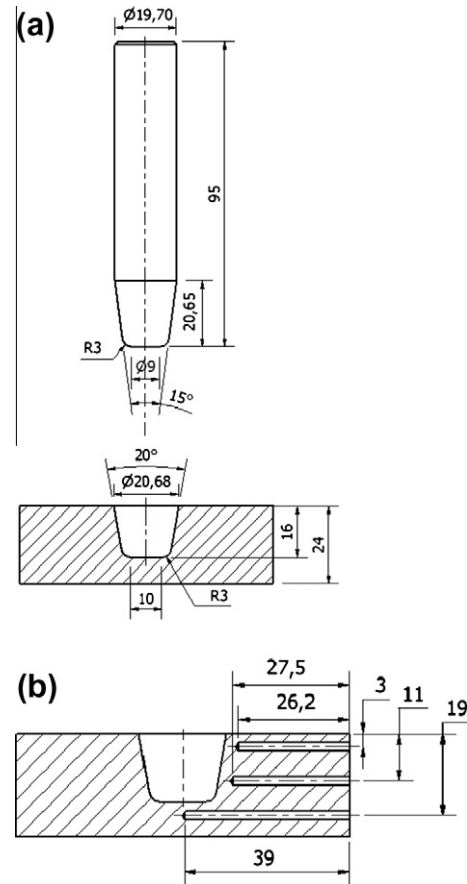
(a) Dimensions of tapered consumable tool and tapered hole. (b) Position of thermocouples used to measure temperature.
